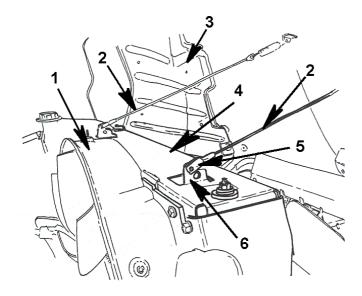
Radiator Top Frame And Cable Stop Assemblies
